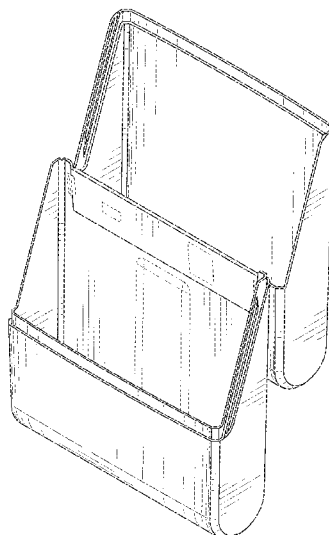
is a perspective view of a clamshell packaging container in an open configuration;
